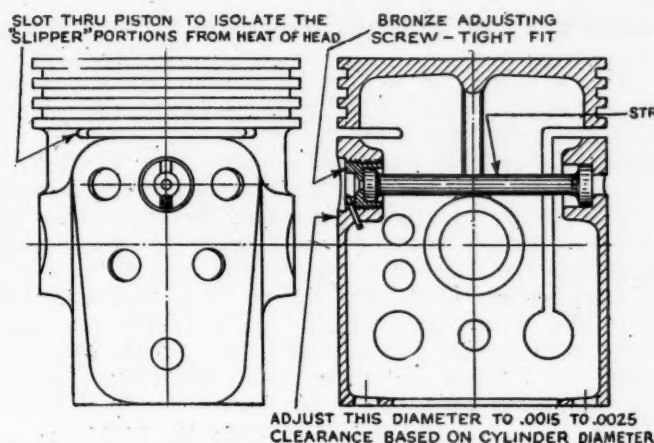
Constant clearance aluminum piston, showing means for adjusting initial clearance
